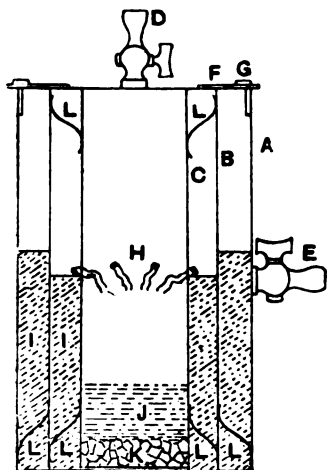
SECTIONAL VIEW OF THE GENERATOR.
